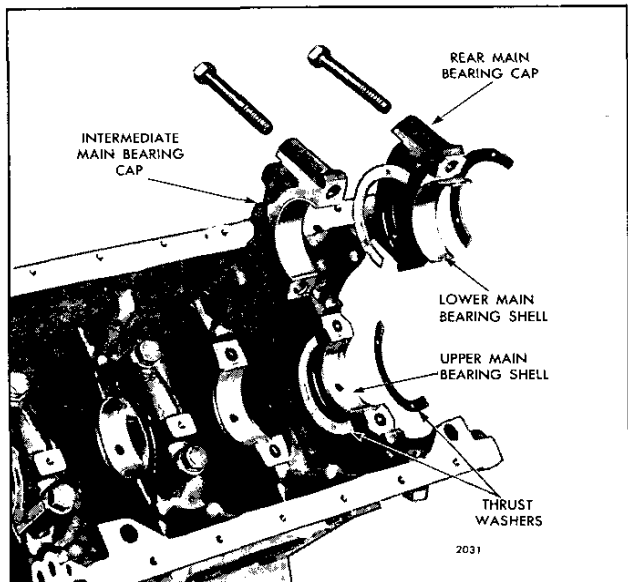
Main Bearing Shells, Bearing Caps and Crankshaft Thrust Washers — In-line Engines
